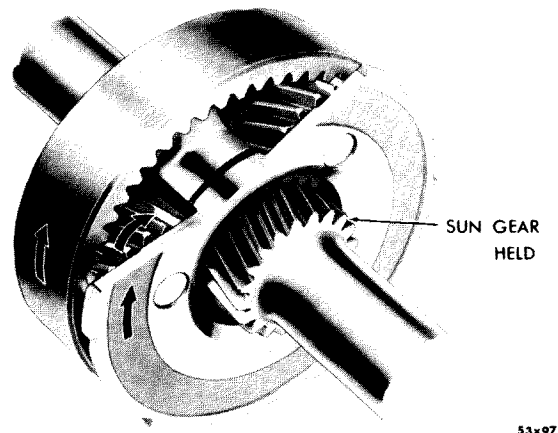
Planetary Gear Set (Sun Gear Held Gear Reduction)
